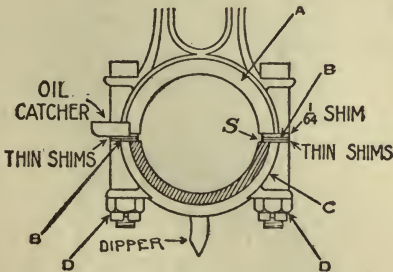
END OF "TWIN CITY" CONNECTING ROD
